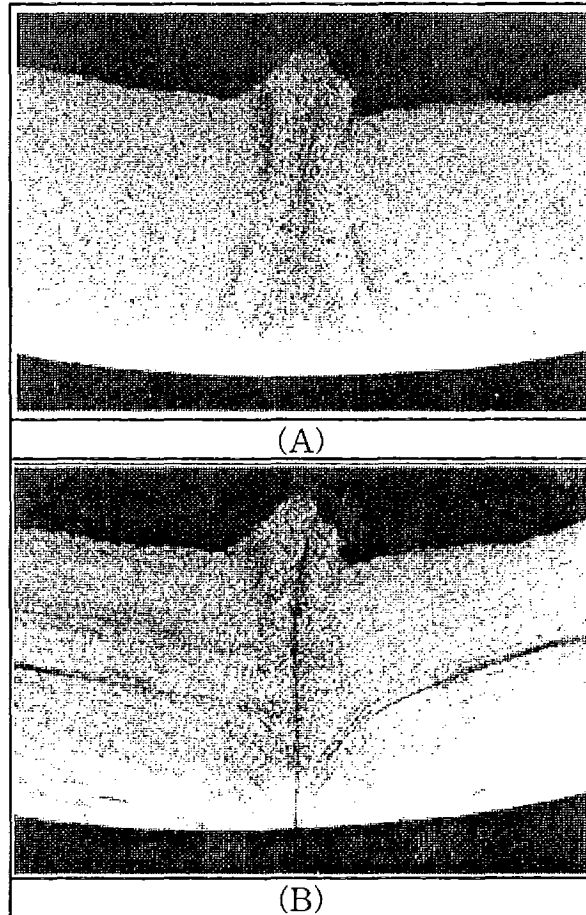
Cross sectional view of uncorroded ERW carbon steel pipe;
